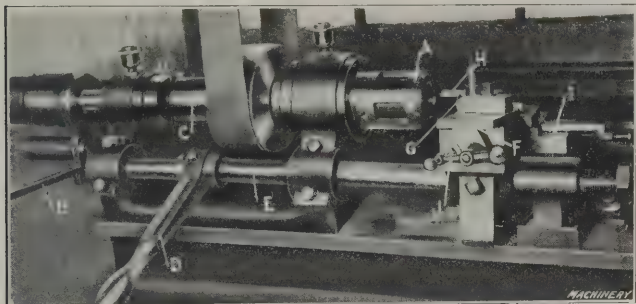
Cutting the Thread in a Screw Back for a Watch Case of the Type shown at B, Fig. 1
